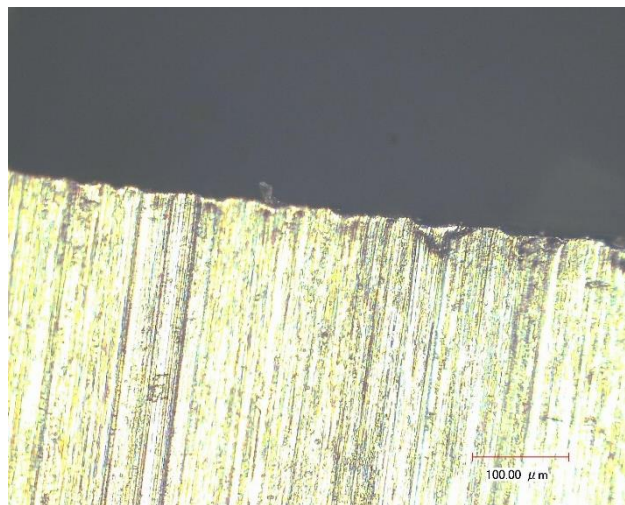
Image of entrance burr in up milling for stainless steel 6 enlarged by digital microscope.
